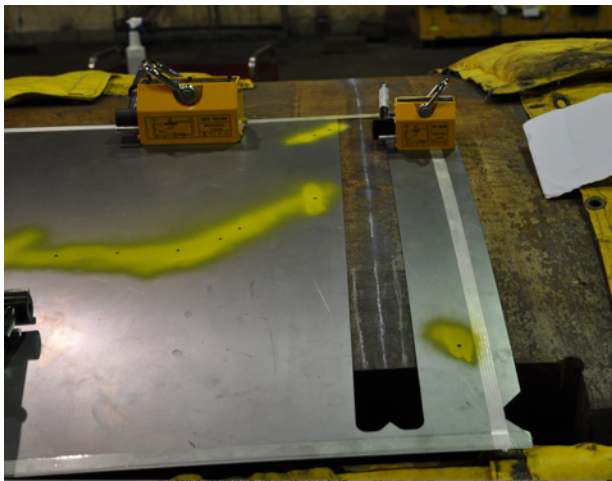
A metal template was aligned with the beltline weld (chalk line) and holes for threading the diamond wire [15].
